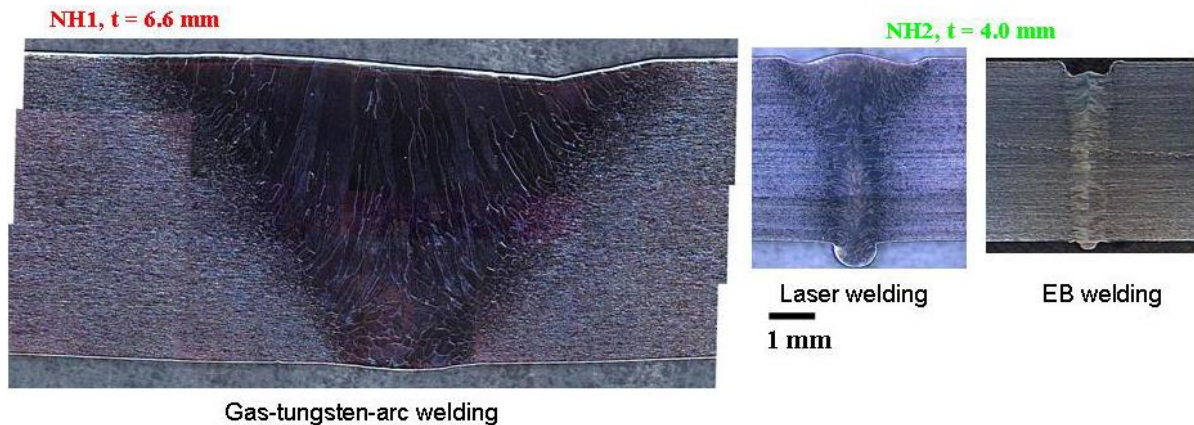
Cross section of weld joint of low-activation vanadium alloy.
